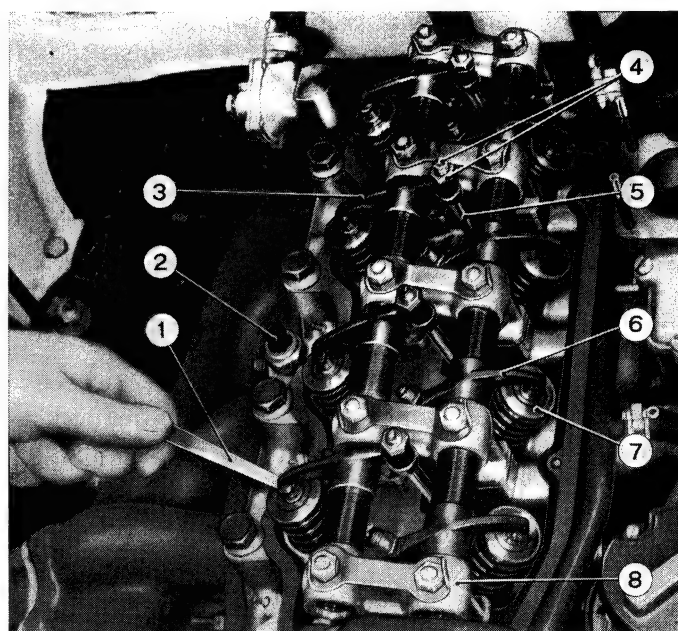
Close-up view of cylinder head, showing tappet clearance adjustment (engine 115 C.005).
